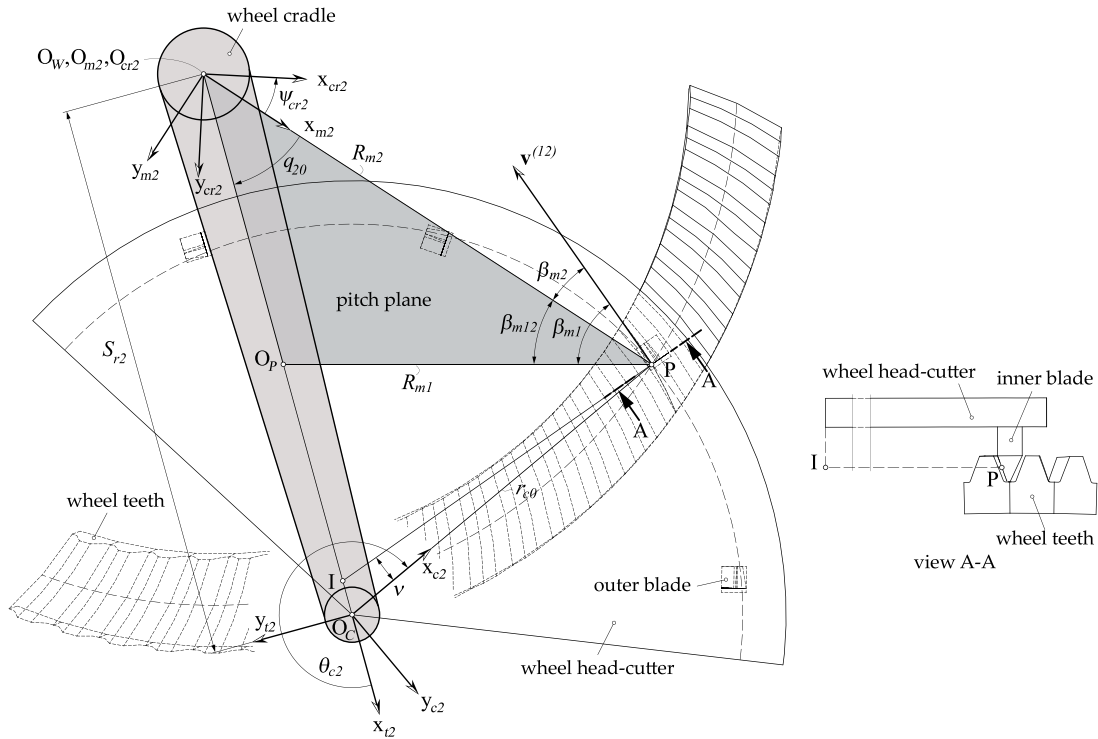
For illustration of the basic machine-tool settings of the wheel.
